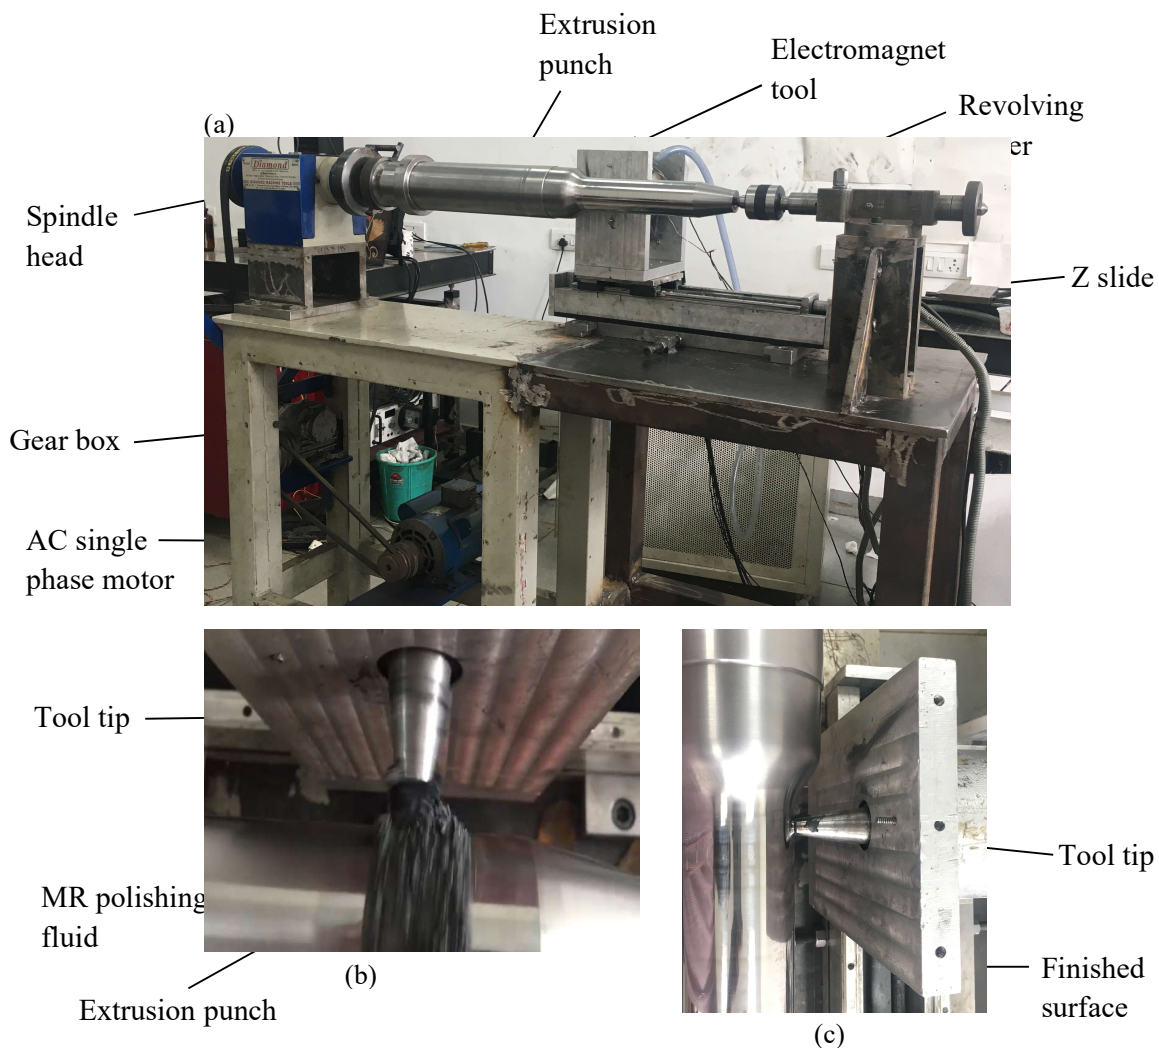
MR finishing process for extrusion punch (a) experimental set up, (b) MR polishing fluid between tool and workpiece and (c) Finished punch surface area
